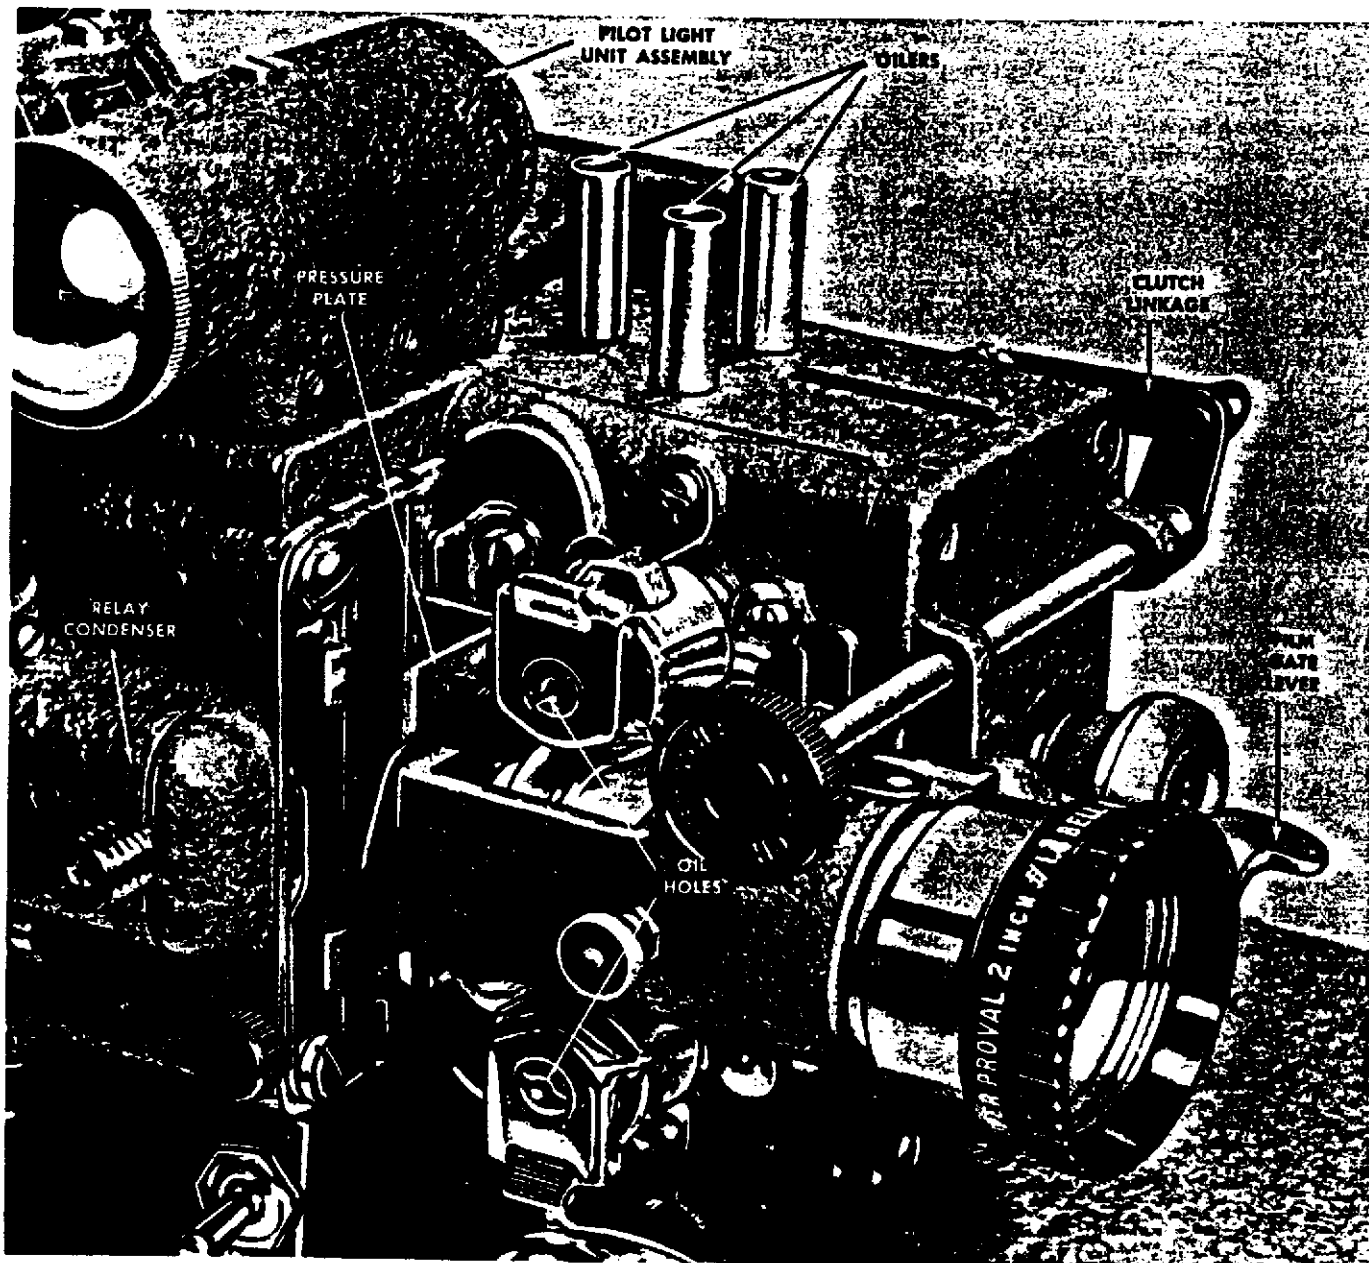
Figure W. Gear Case Completely Assembled Showing Points of Lubrication
